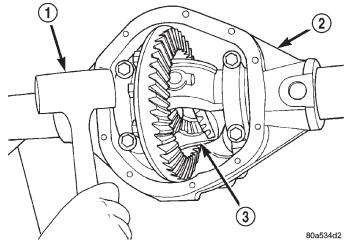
Seat Pinion Gear Side Differential Dummy Side Bearing
